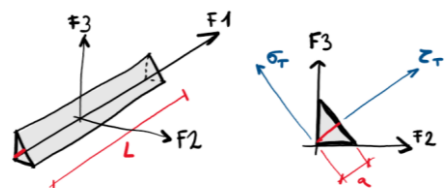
Stresses on the throat section of a fillet weld
